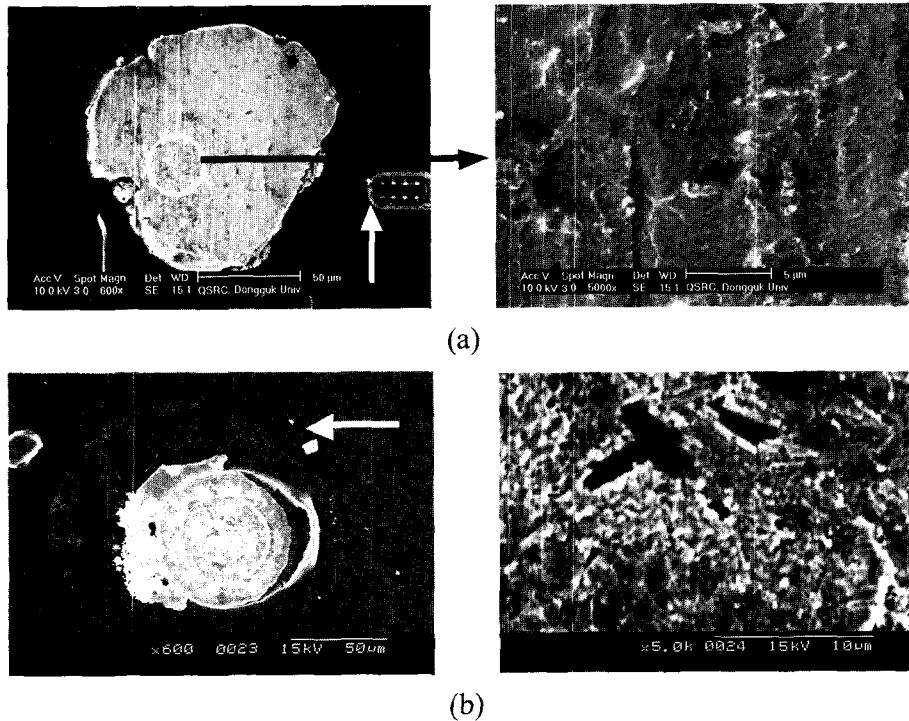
Fracture surface of solder bump after aging at 175°C for 900 hrs. (a) Sn-97wt%Pb, (b) Sn-37wt%Pb.
